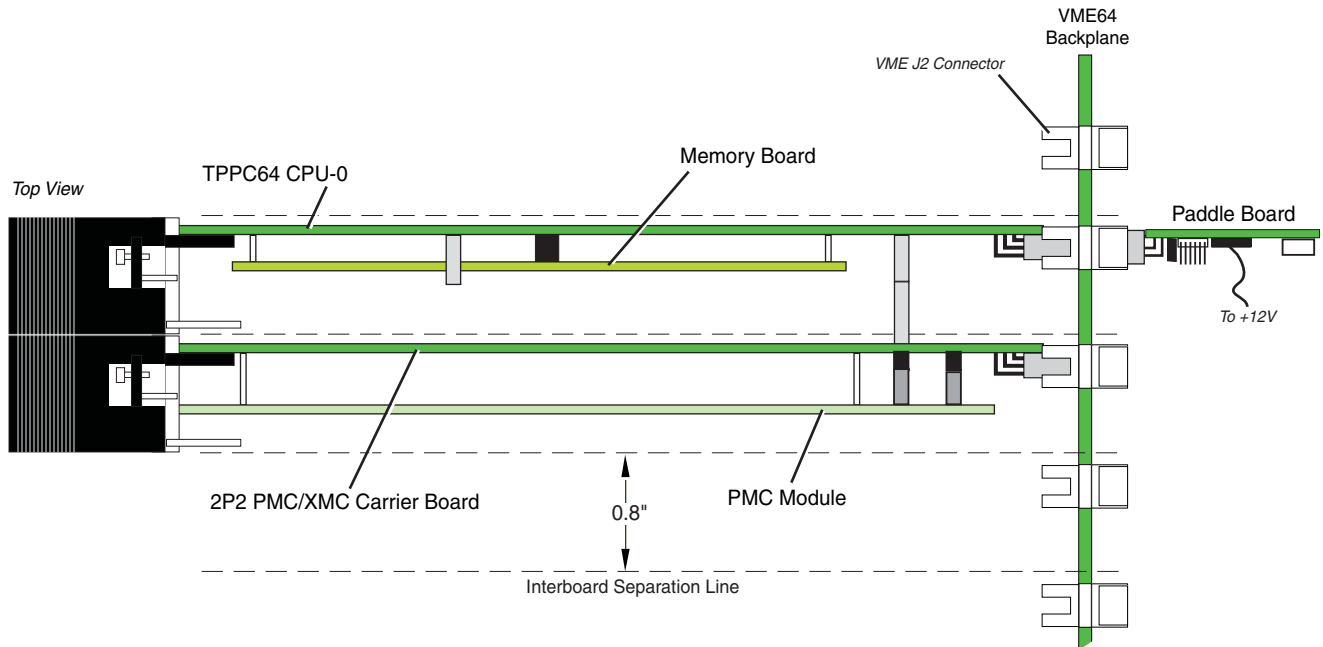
TPPC64 CPU-0, Carrier Board, and Paddle Board Installed
